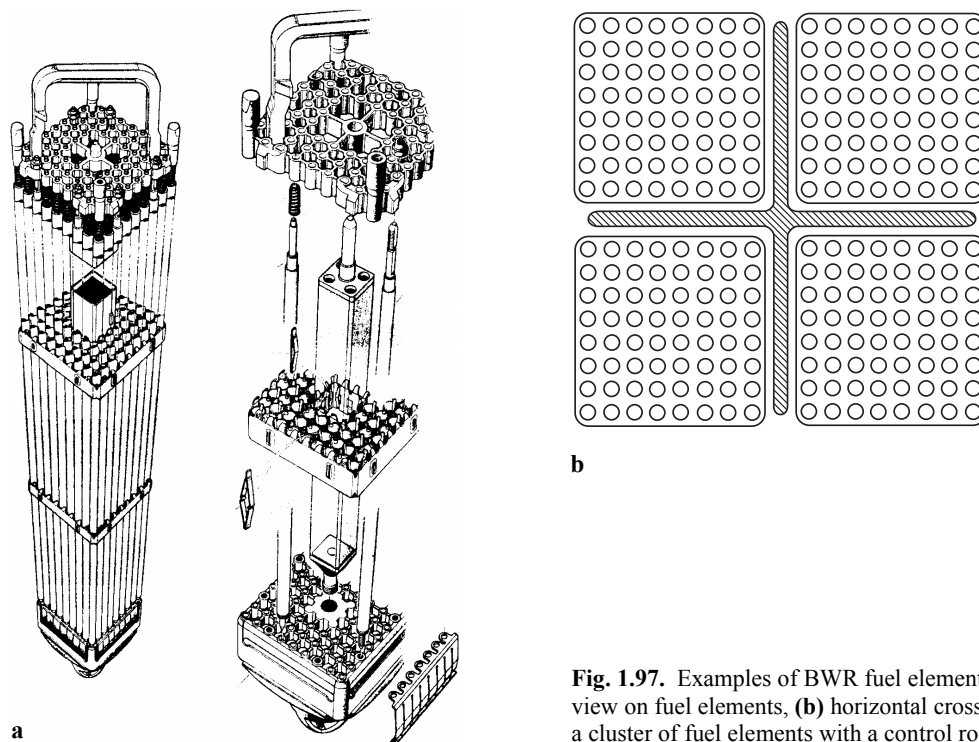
Examples of BWR fuel elements: (a) isometric view on fuel elements, (b) horizontal cross section through a cluster of fuel elements with a control rod.
